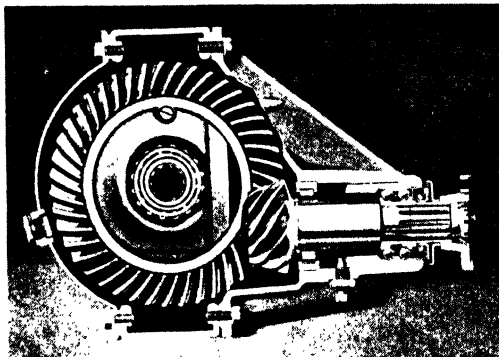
THE OLDSMOBILE HYPOID-BEVEL FINAL DRIVE, SHOWING GEARS AND BEARINGS
